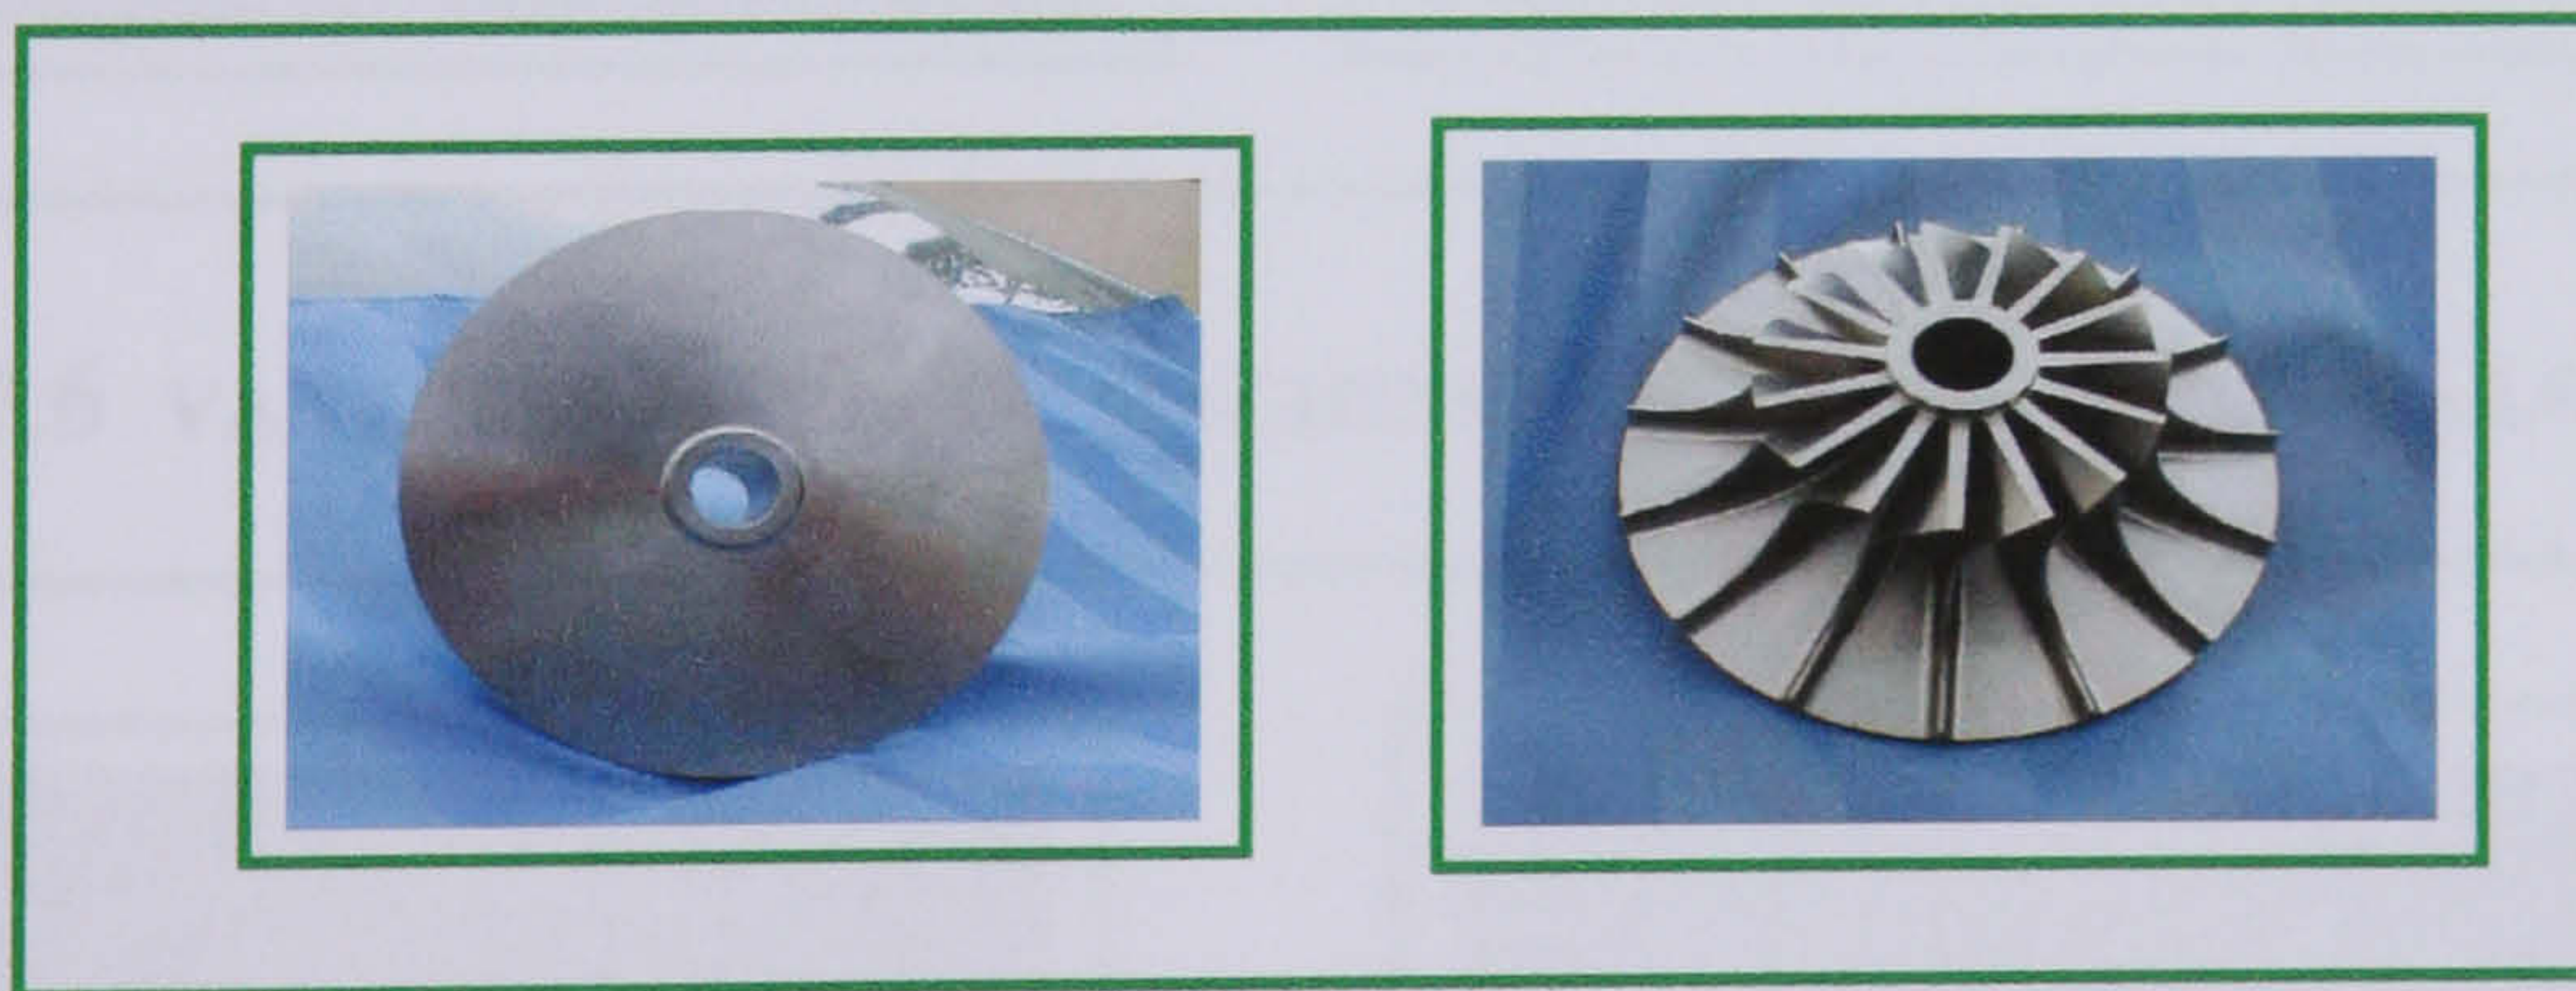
COMPRESSOR IMPELLER MACHINED FROM TITANIUM TI-6Al-4V, GRADE 5
